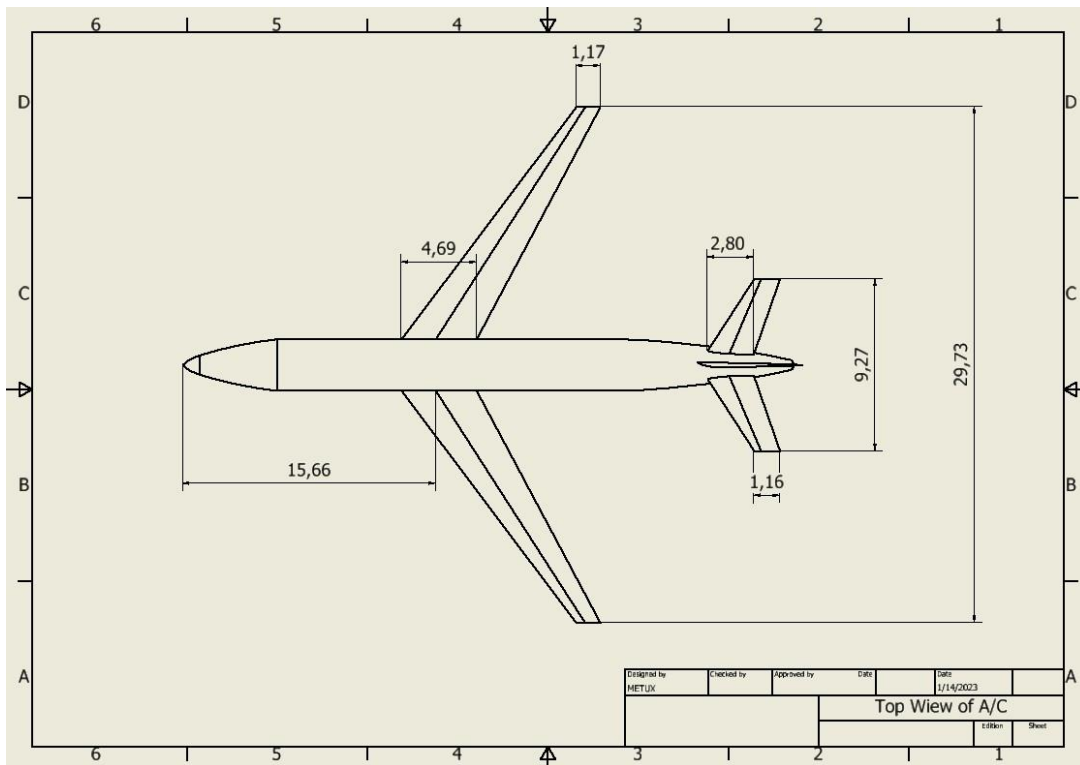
Top view of Business jet aircraft, all dimension in meters
